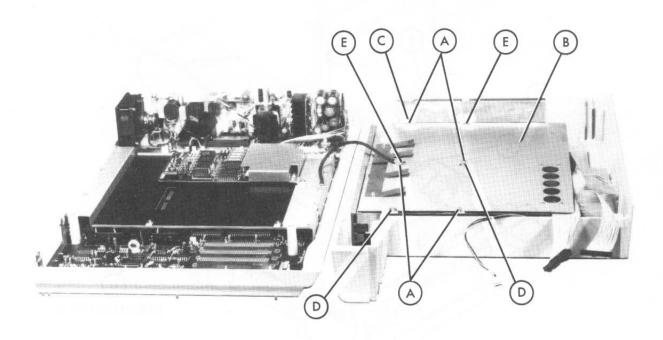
FDD UNIT REMOVAL/REPLACEMENT
